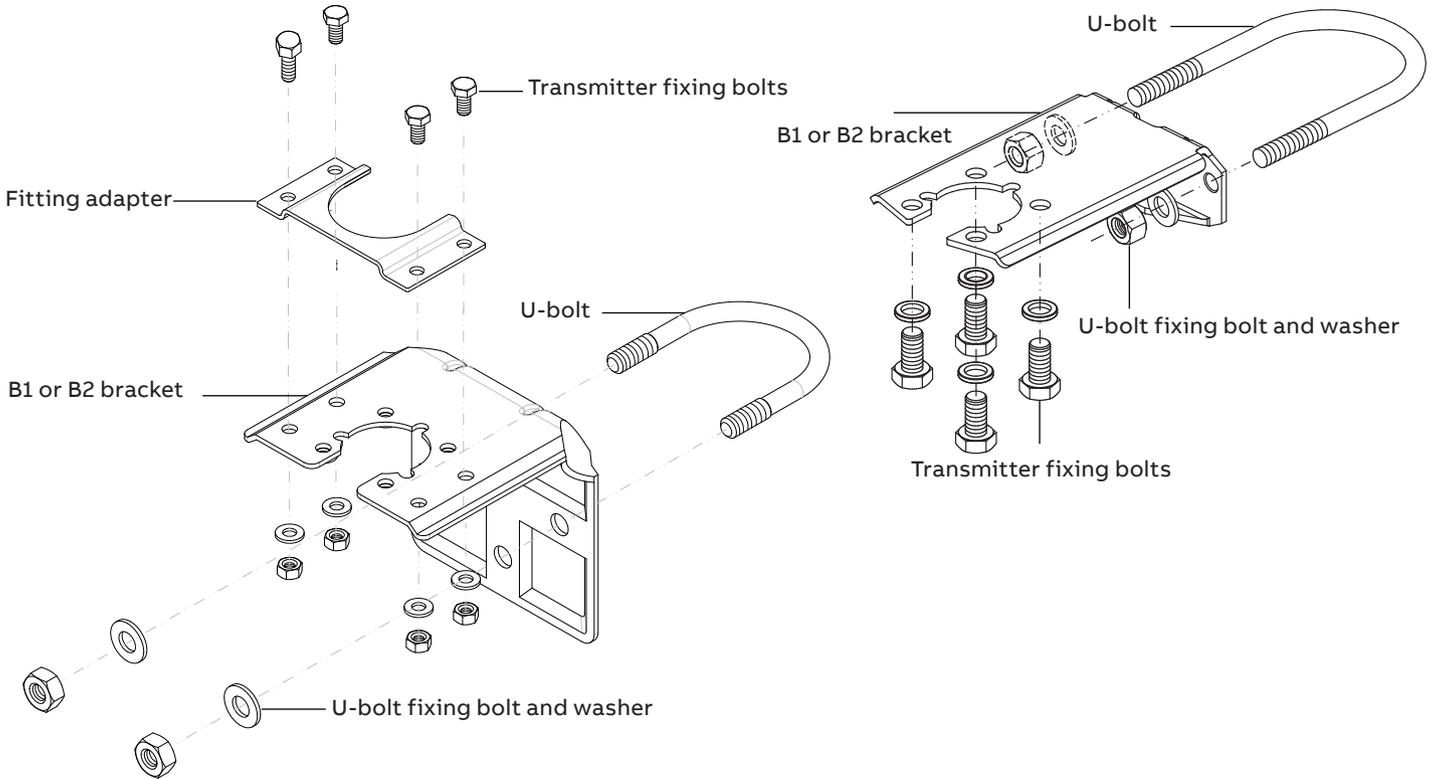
Pipe and wall mounting bracket kits for P style transmitter with Barrel housing
